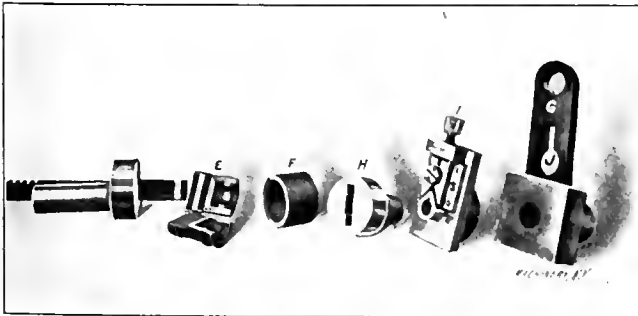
Draw-head Locks, Guide-bushings and Cam Jig used on the La Pointe Broaching Machine, Fig. 3.
